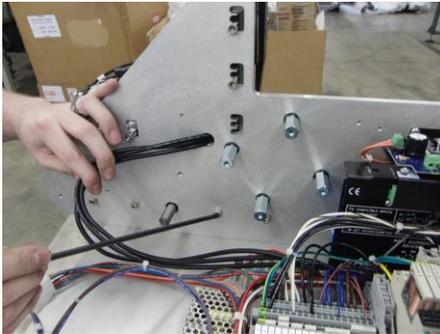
Remove bottom 4 screws on the left panel to release the carriage.
